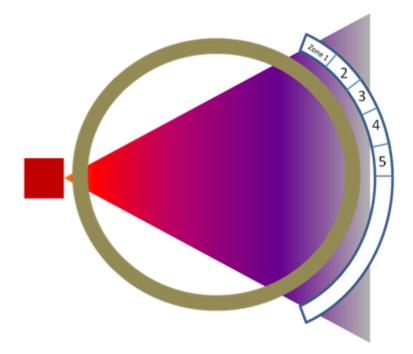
Example of zones for assessment of Pipe Sample 1 weld.
